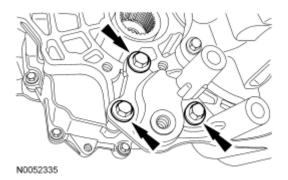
Locating Transaxle Bracket Bolts Courtesy of FORD MOTOR CO.
